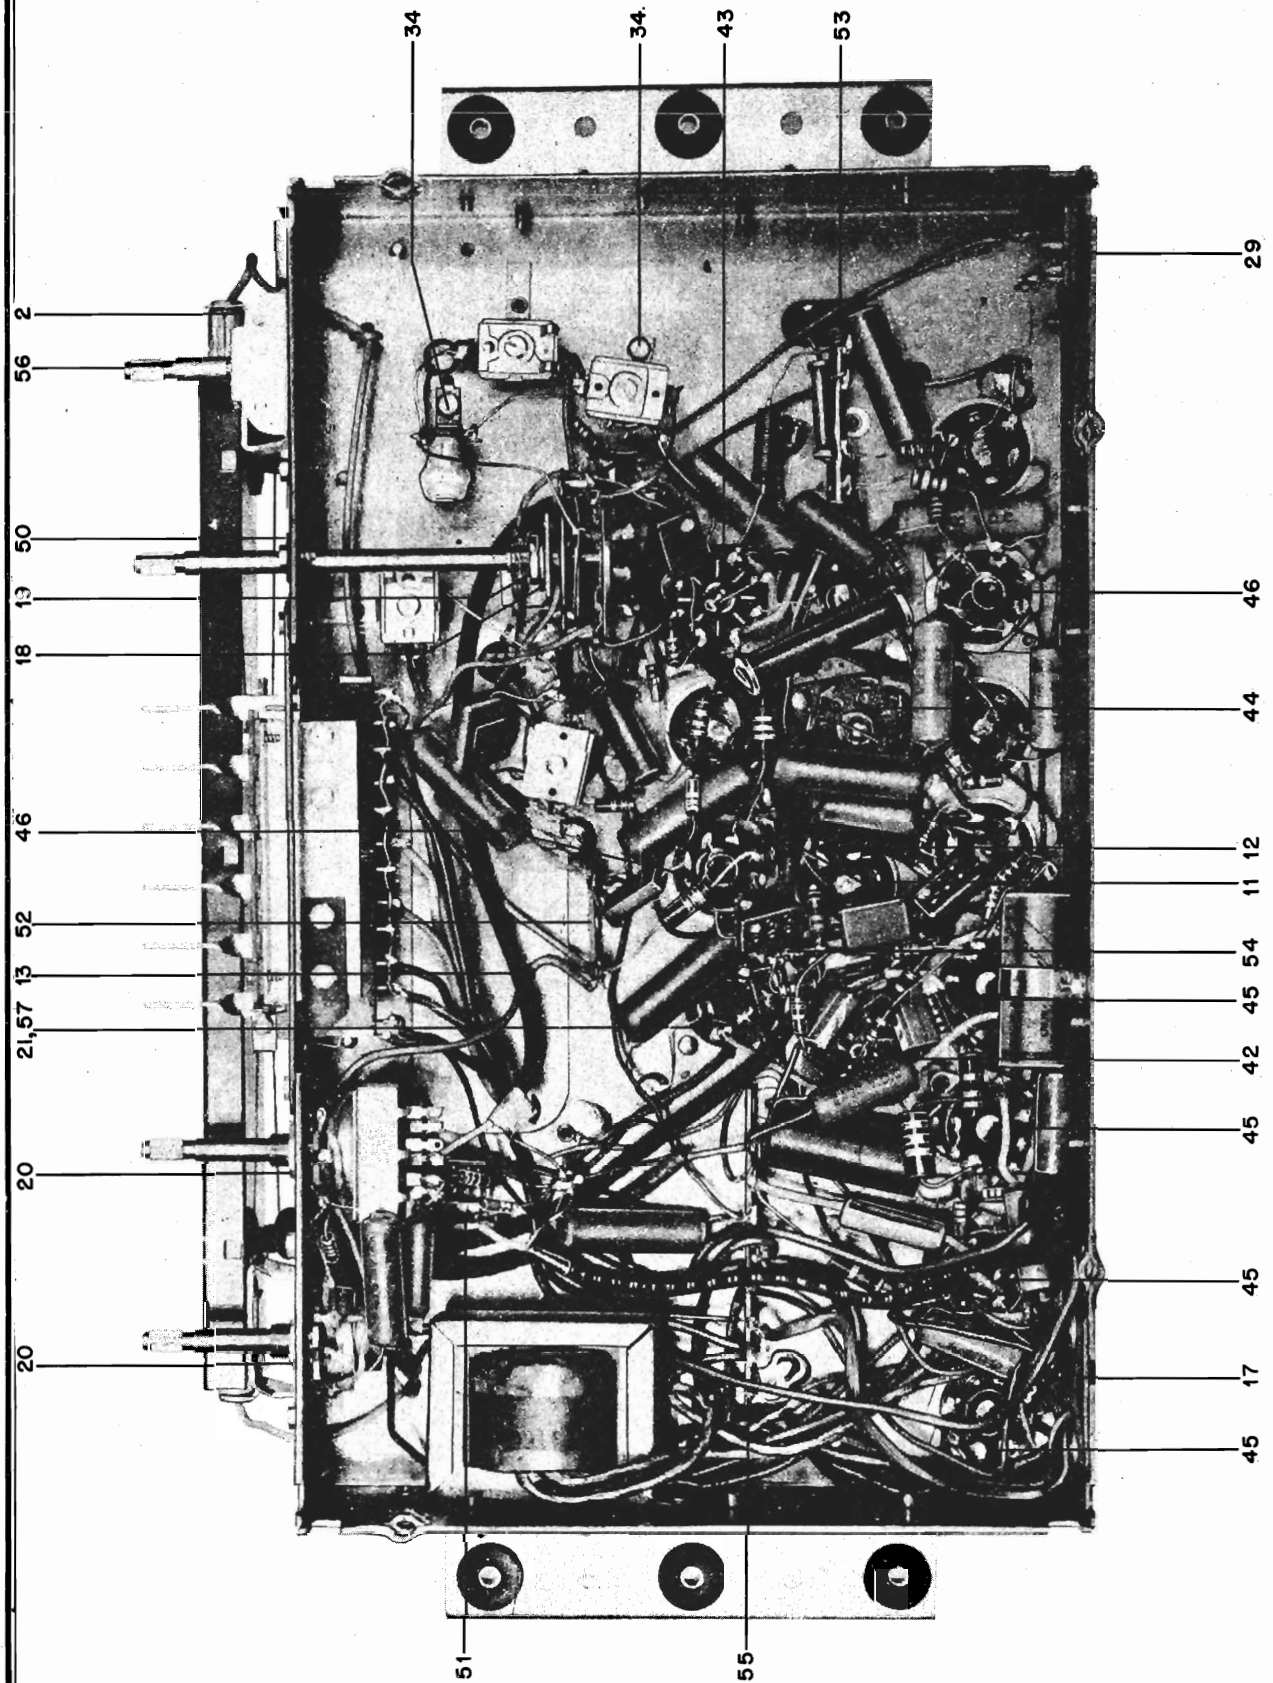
PARTS LOCATION - CHASSIS HS-87, BOTTOM VIEW - MECHANICAL PARTS
